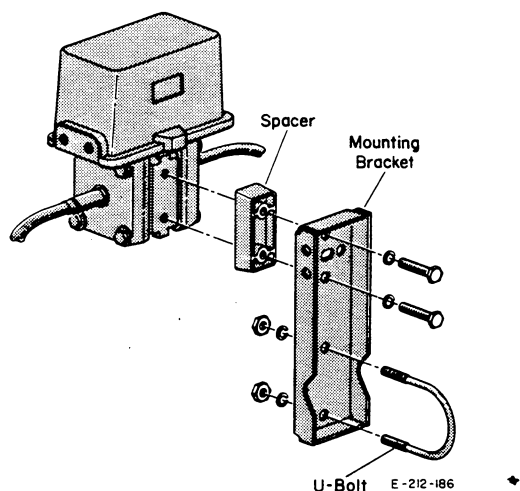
Assembling Optional Mounting Bracket Kit, Accessory (146)
